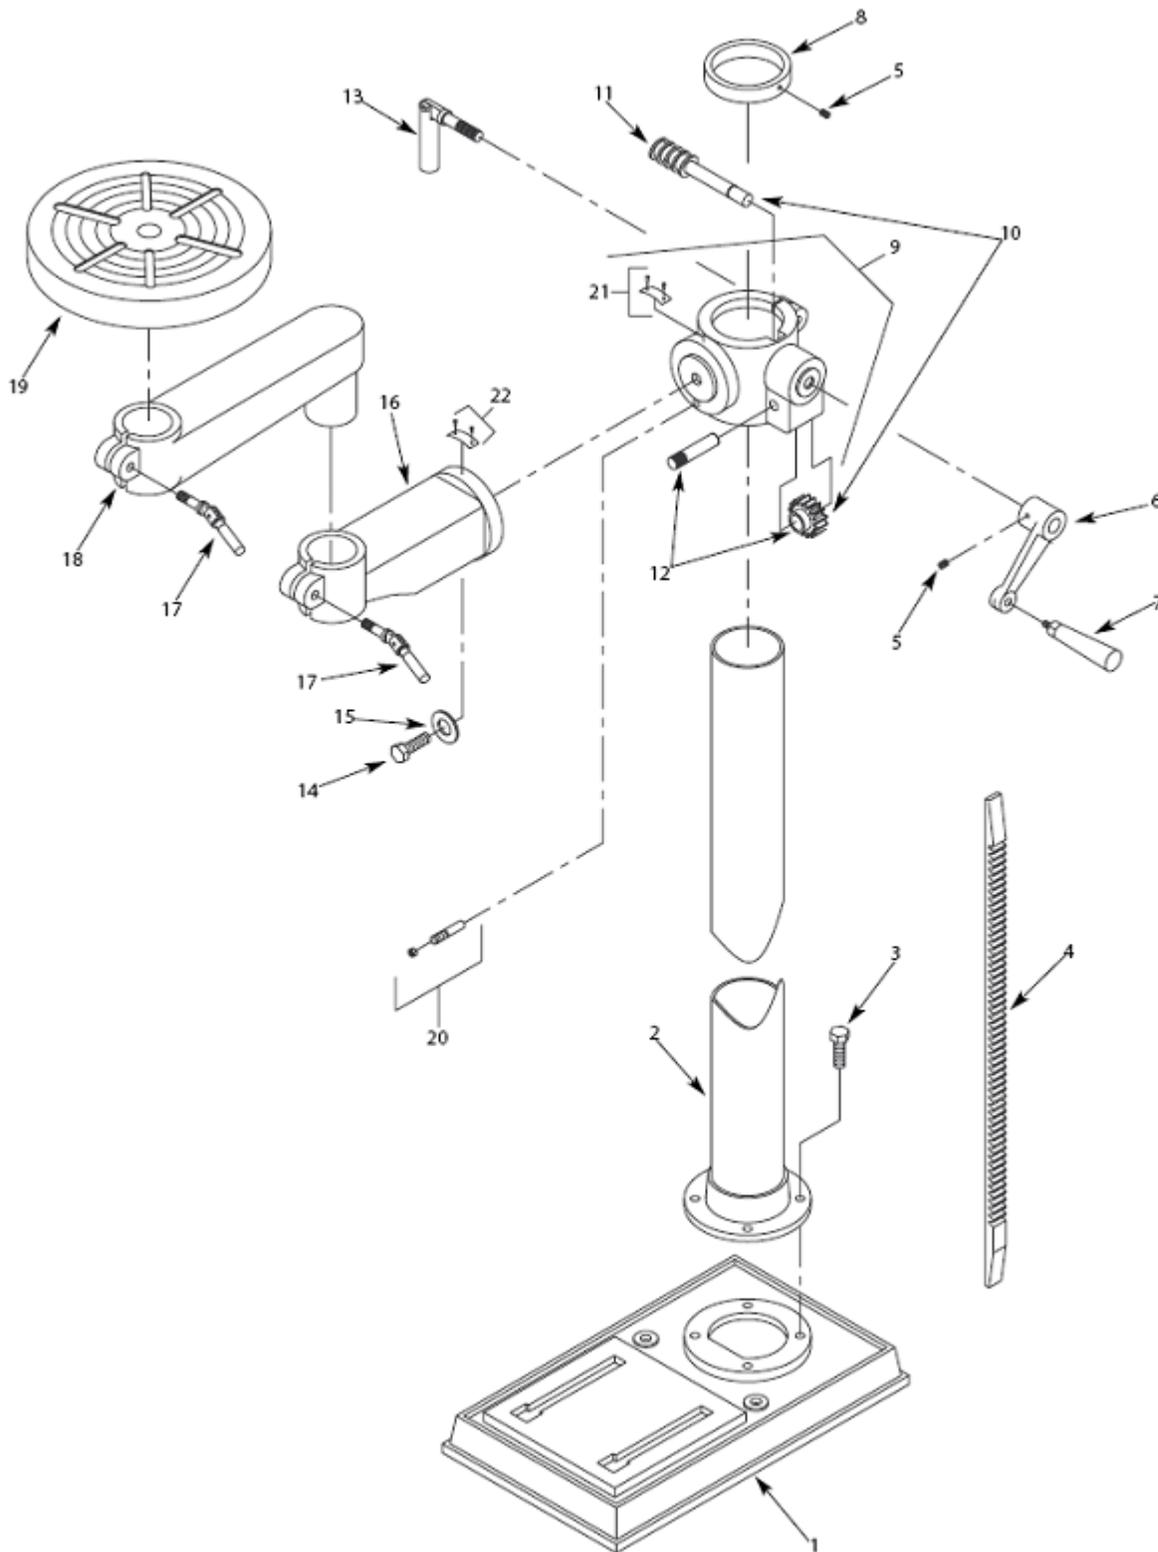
Replacement Parts Illustration for Base (Model ZQJ3116A)
